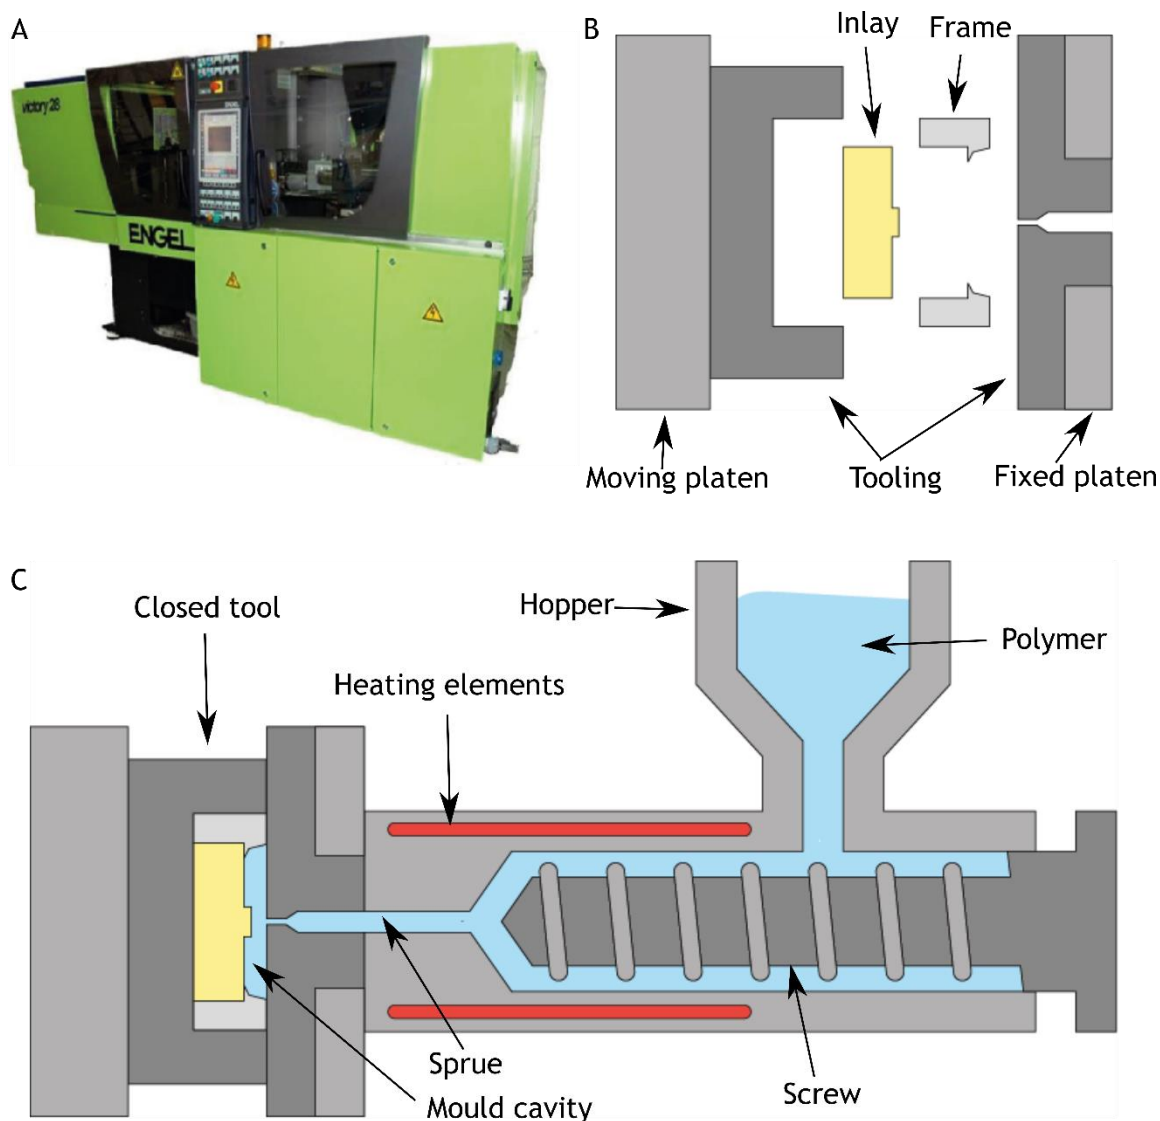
Injection moulding machine anatomy. A photograph of the injection moulder used in this project is shown in A with the plastic heating on the right-hand side of the control panel, and the tooling on the left. B shows an exploded view of the tooling showing how patterned inlays can be incorporated into the mould. C shows a schematic overview of the whole injection moulder with the hopper filled with polymer, the heaters to melt the polymer, the screw to drive the melt into the mould, and the closed.
